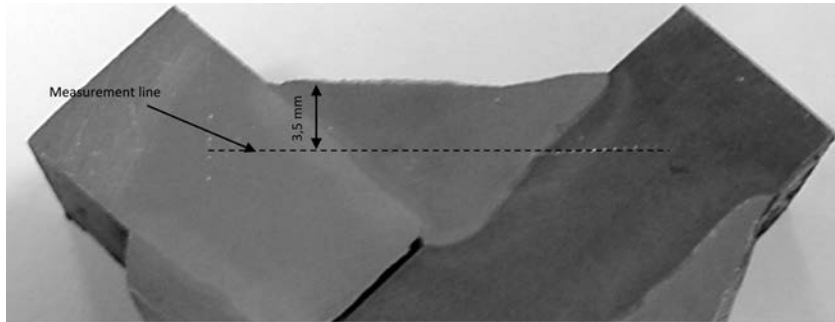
HV1 measurement line on cross-section of a stress-relieved joint type C (cruciform non-load-carrying fillet-welded joint)
